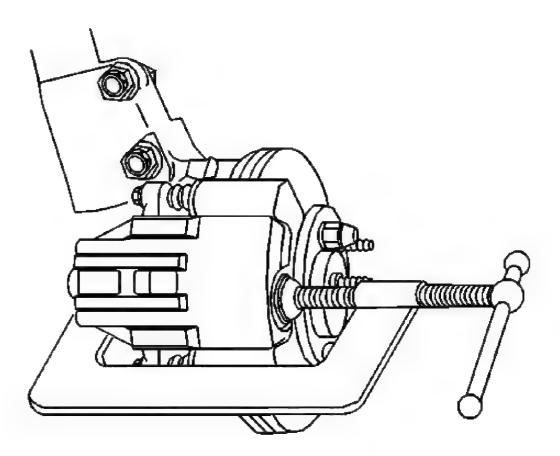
Using C-Clamp To Compress Caliper Piston Courtesy of GENERAL MOTORS CORP.
